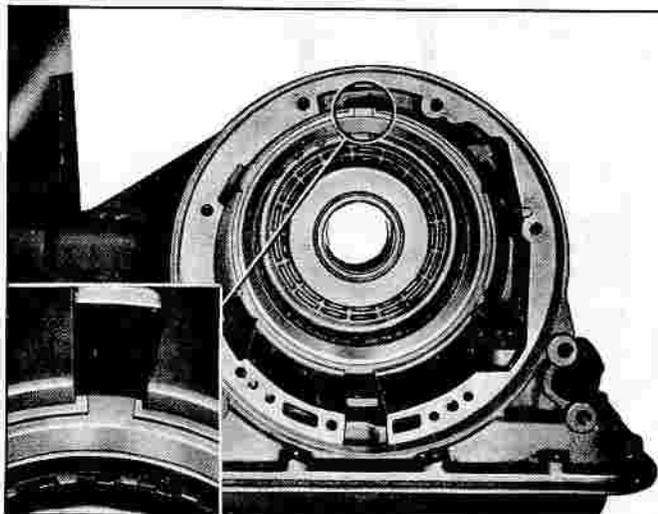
E-25—Reverse Clutch Pack Retainer Ring
